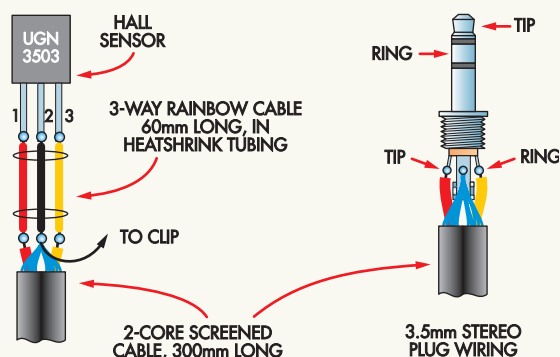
(below): a 60mm-length of 3-way rainbow cable is used to make the connections to the Hall sensor. This cable is then joined to a 300mm length of 2-core shielded cable which is then terminated in 3.5mm stereo plug.
